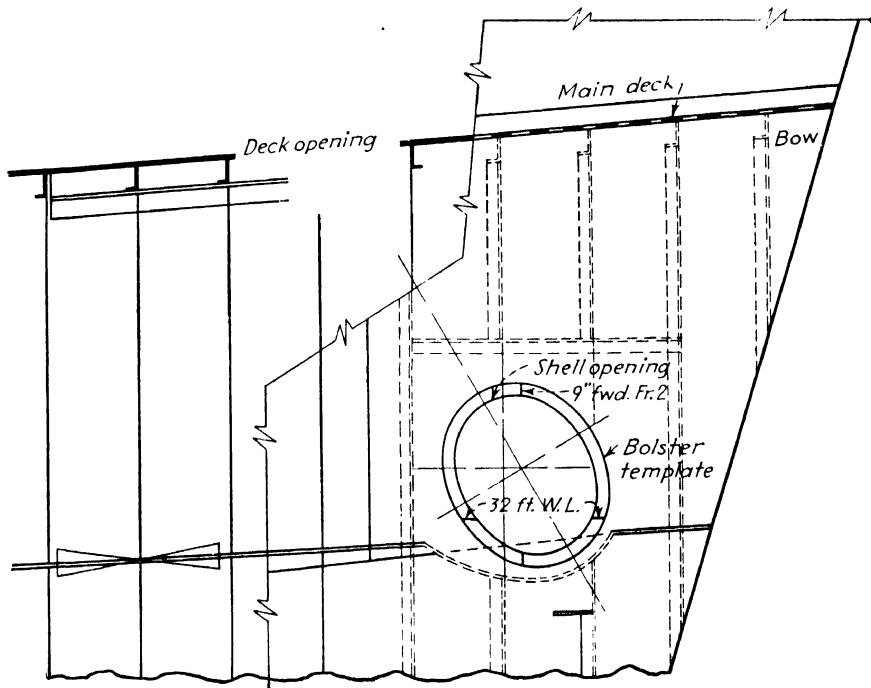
Template of outline of the bolster and opening cut in the shell for a hawsepipe.
